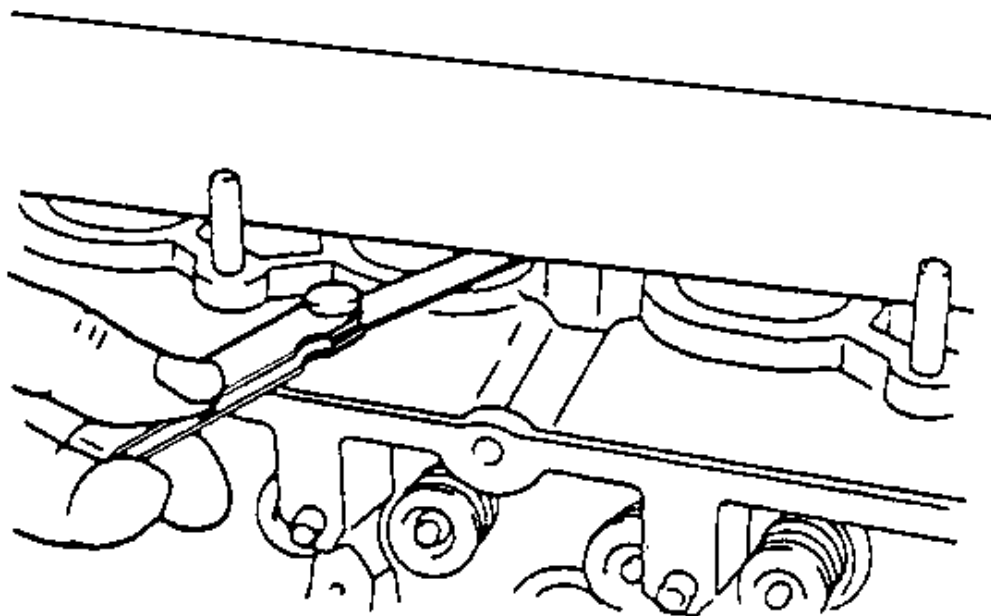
Inspecting Cylinder Head Intake Surface For Flatness
